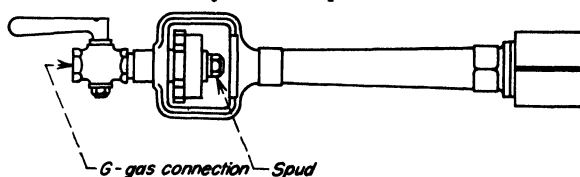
Torch burner, atmospheric. Gas issuing from the spud injects air into the venturi-shaped mixer. (Surface Combustion Corp.)
